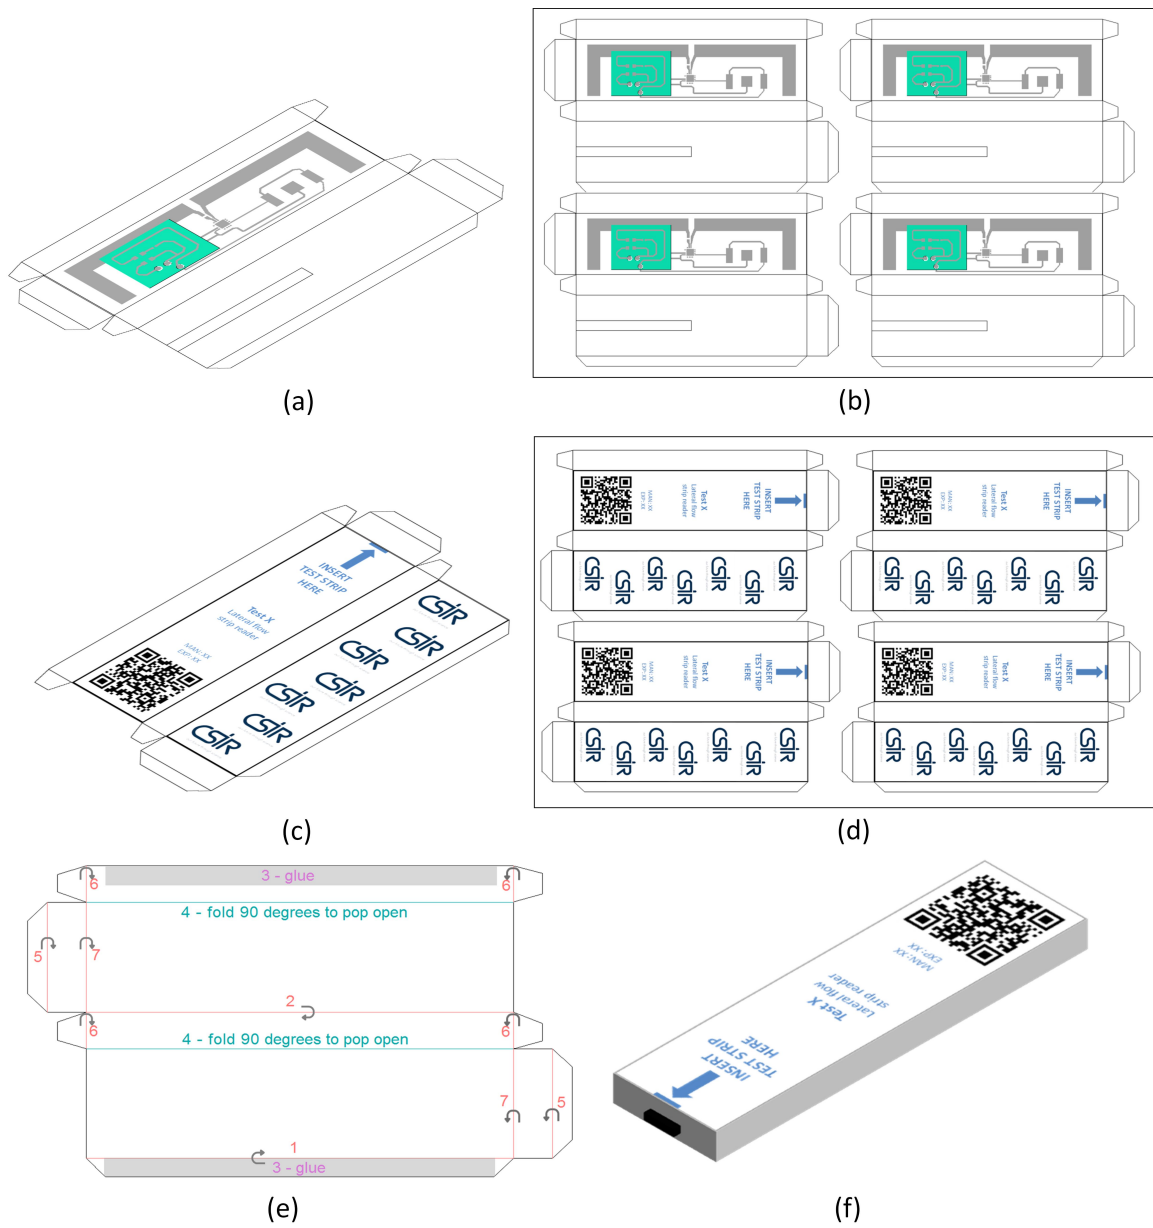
Scalable packaging designs for printed wireless colour detector modules. a) Front (inside) printed electronics design, b) reverse (outside) graphics design, c) sheet format of design for printing, d) folding instructions with assembly steps numbered (black lines = cut, pink and blue lines = crease), and e) complete assembled device.
